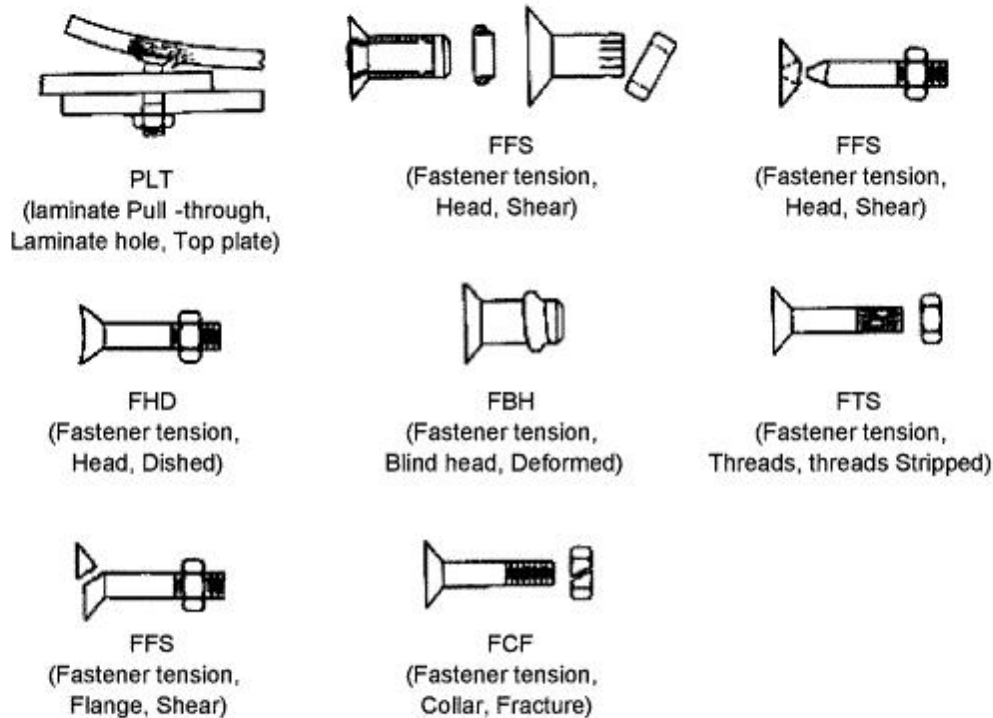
Common Fastener Pull-Through Failure Modes
